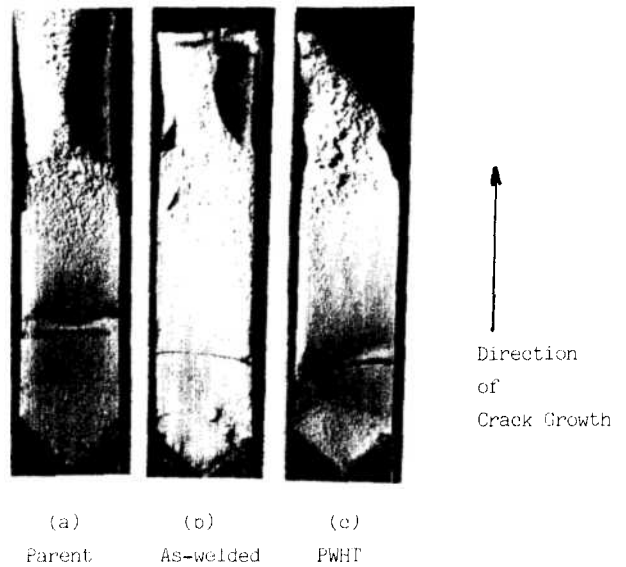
Typical macro fracture surfaces for single overload tests
